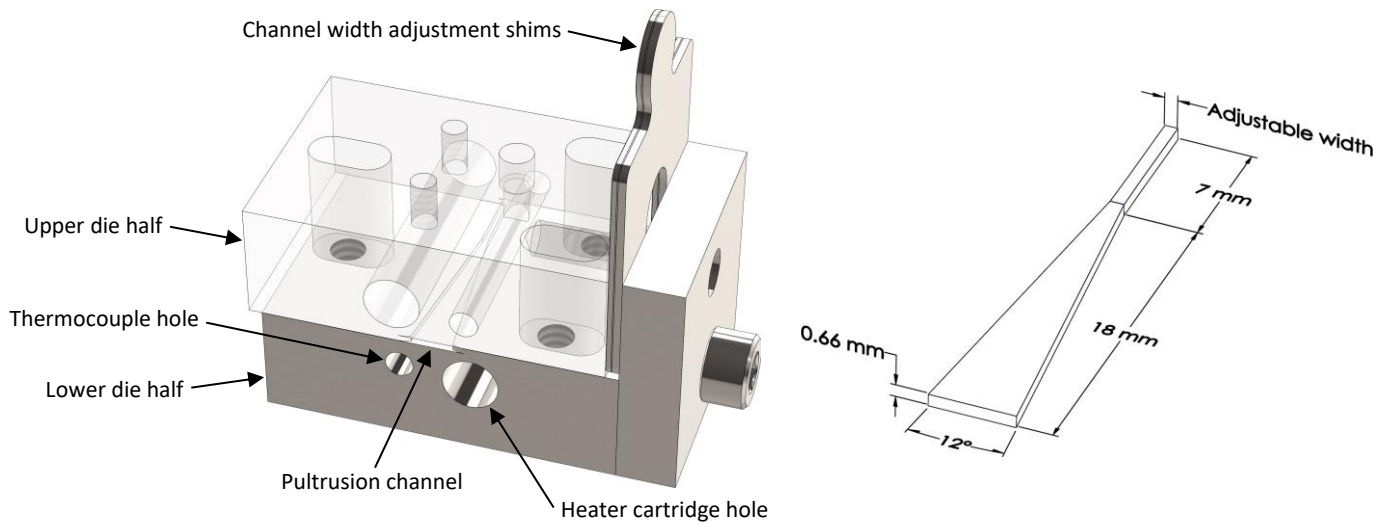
Left: Components of the pultrusion die. Right: Dimensions of the channel formed by the pultrusion die halves.
